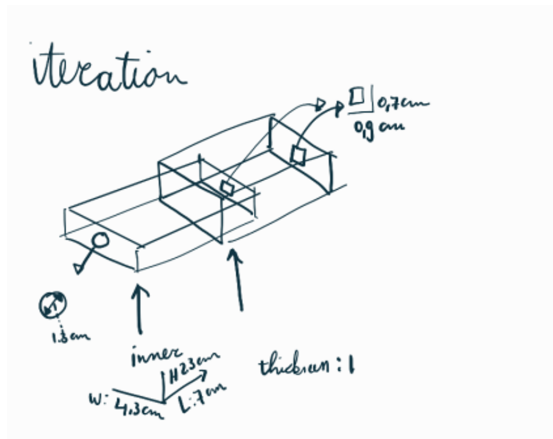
Encasing design drawing 1 of the IR tracking device
